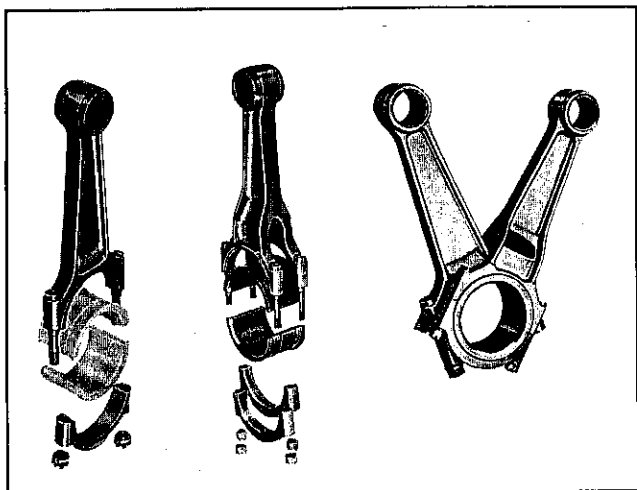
Connecting Rods—Blade, Forked, with Bearing.
